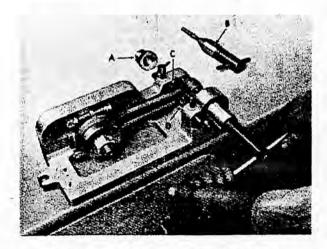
REAMING GUDGEON PIN BUSH. FIXTURE 6200A WITH REAMER SET MF6200AD
